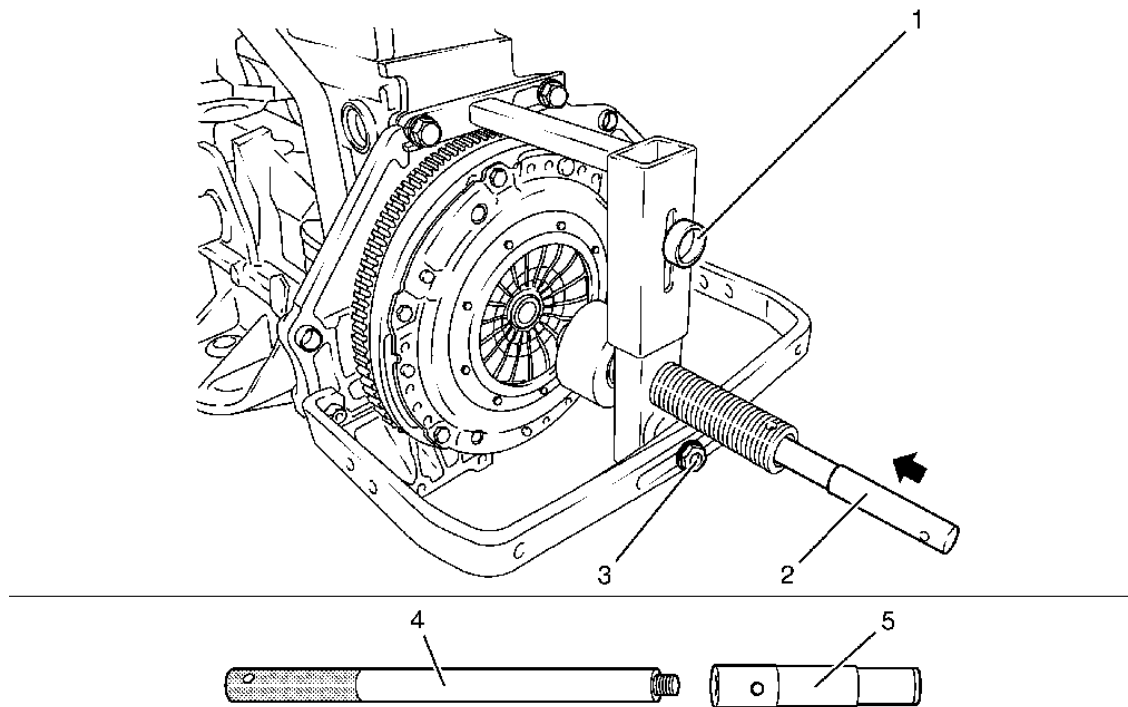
Engine Block, Clutch Assembly Remover And Installer (DT-6263)
